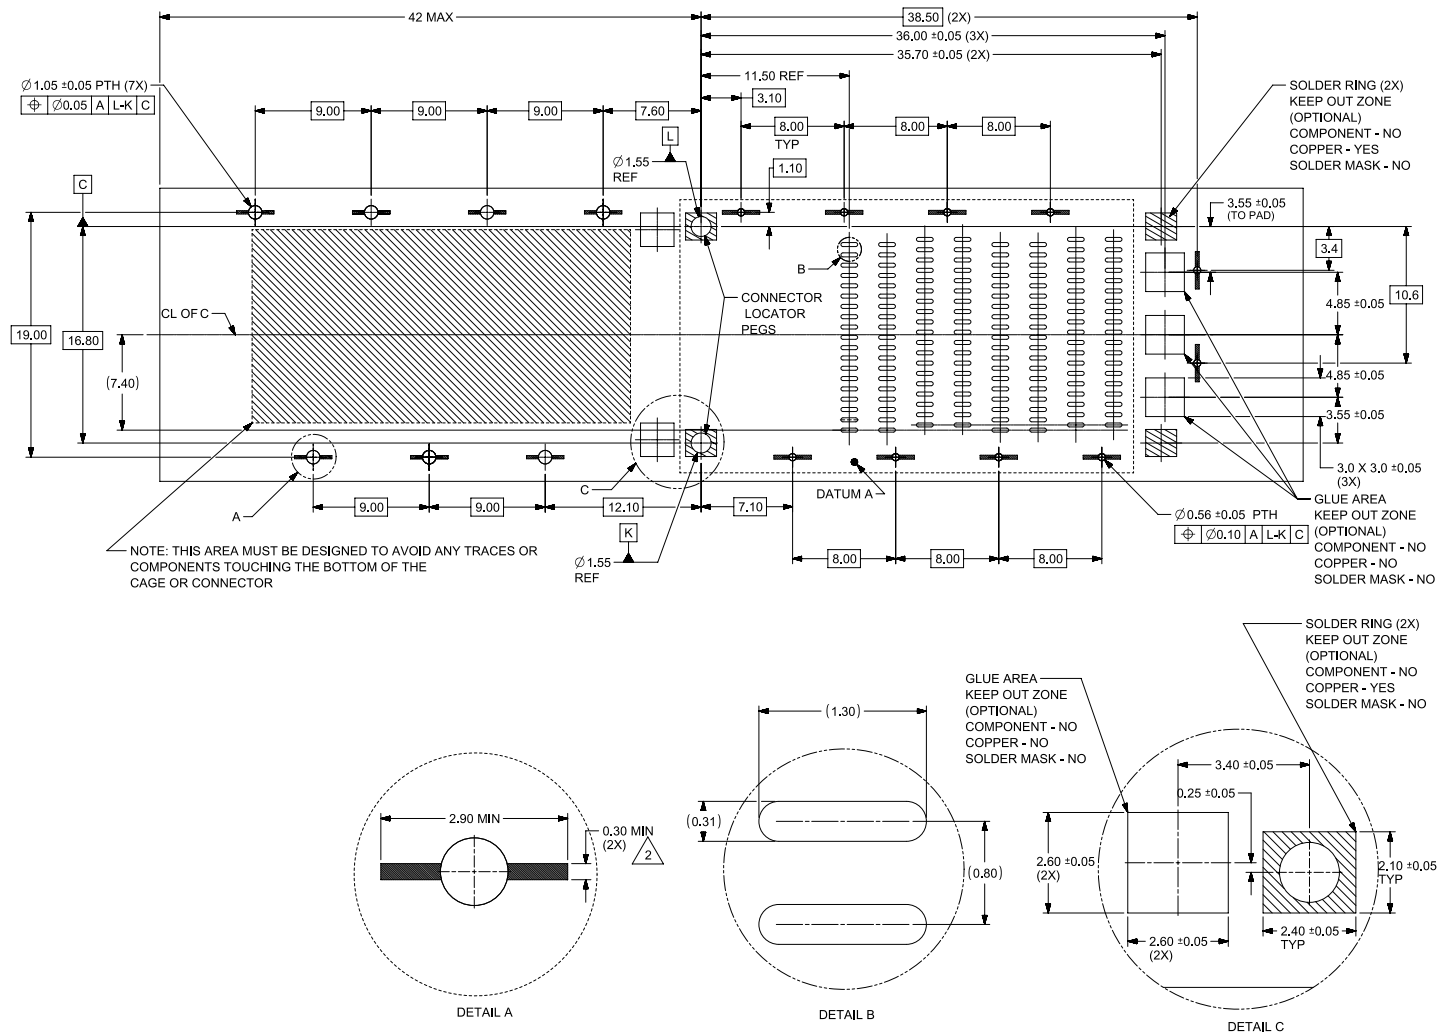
2x1 SMT Connector and Cage PCB Layout Implementation 1
